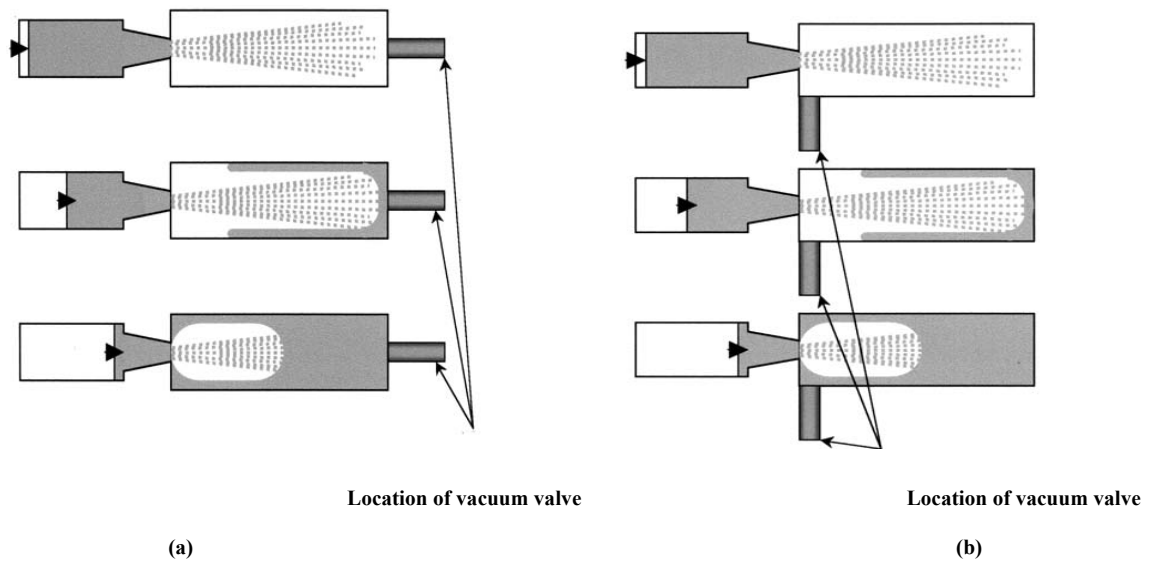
Graphical illustrations showing the progression of a die cavity filling with (a) improper vacuum valve placement; (b) proper vacuum valve placement [25].
